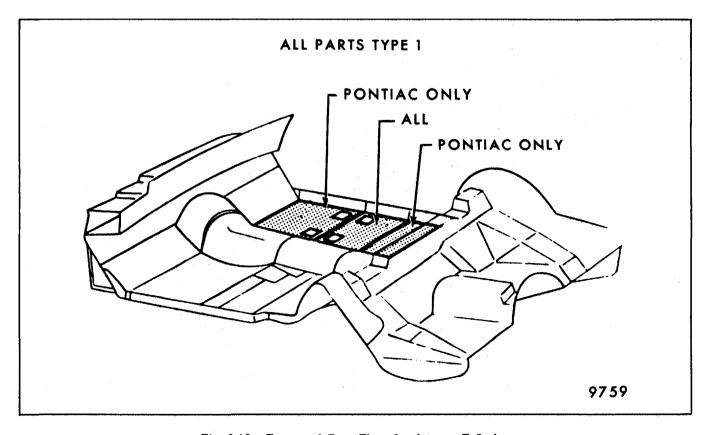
Front and Rear Floor Insulators - F Styles
